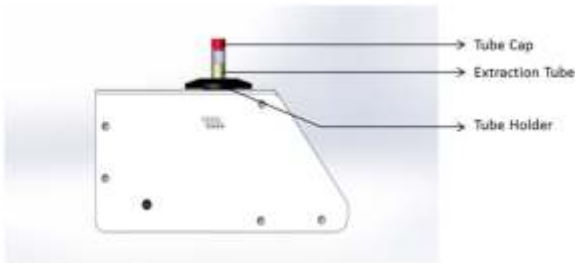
Extraction Tube placed in Tube Holder, and the Tube Sealed with the Cap (in red)
